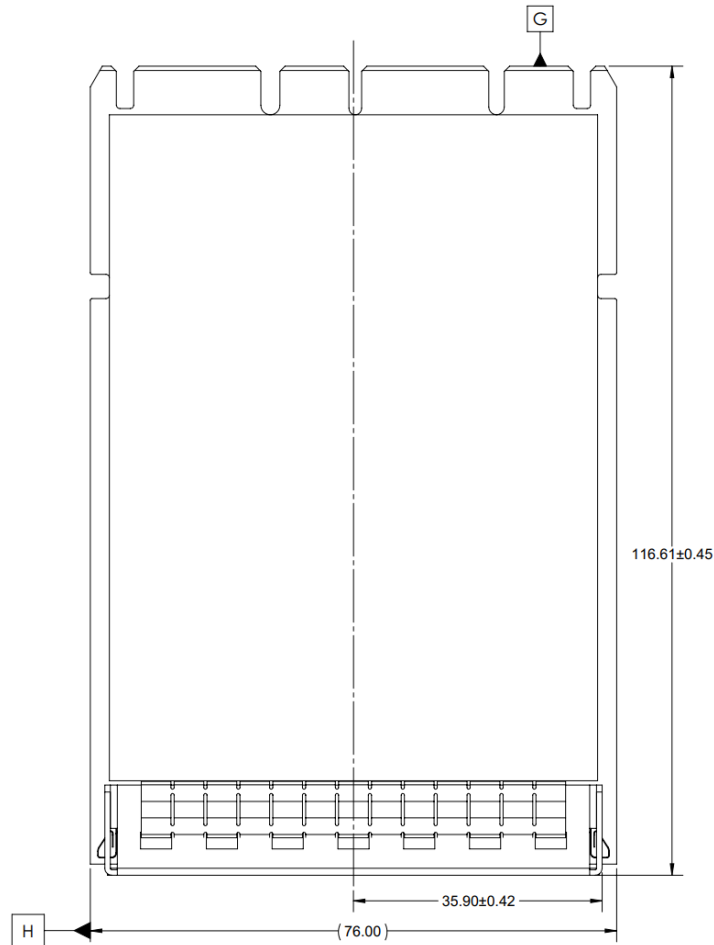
SFF OCP NIC 3.0 Card with Internal Lock CTF Dimensions (Front View)
